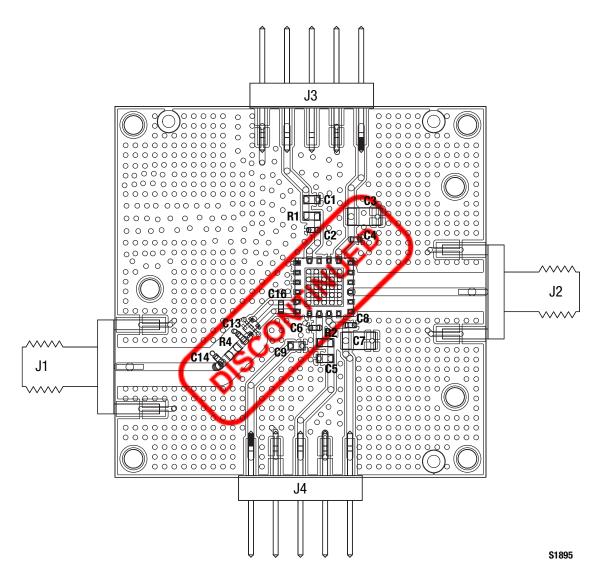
SKY65352-11 Evaluation Board Assembly Drawing
